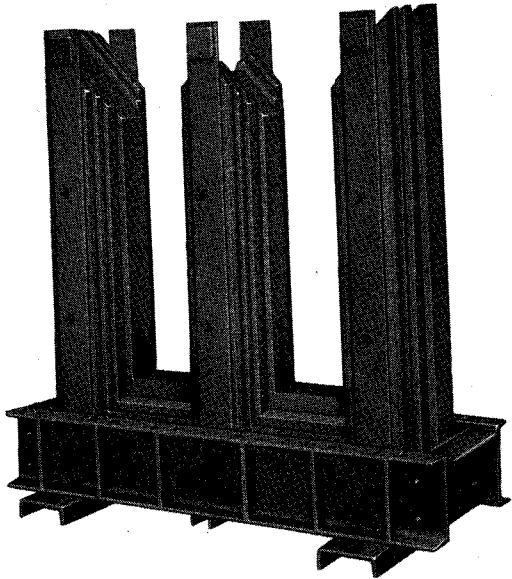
Partial Hipersil Core Assembly For a Three-Phase Transformer.
